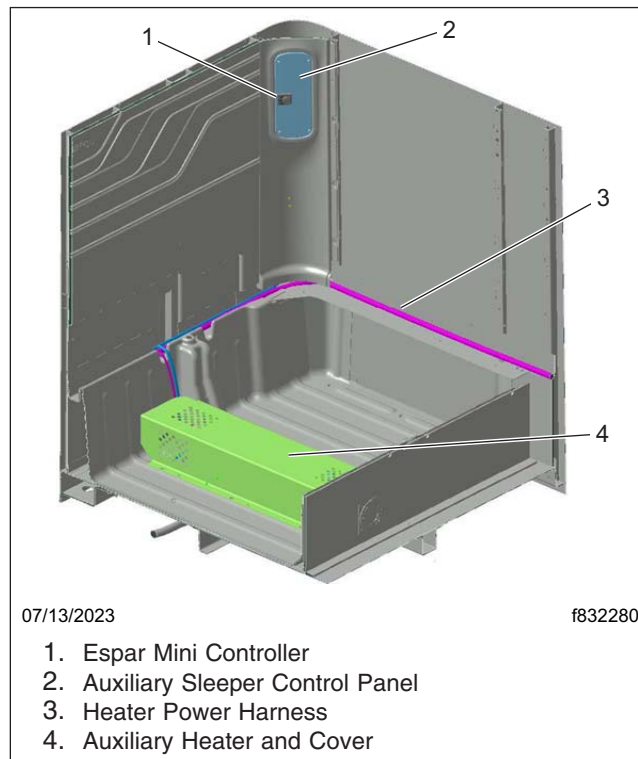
, Location of the Auxiliary Heater and Sleeper Control Panel
